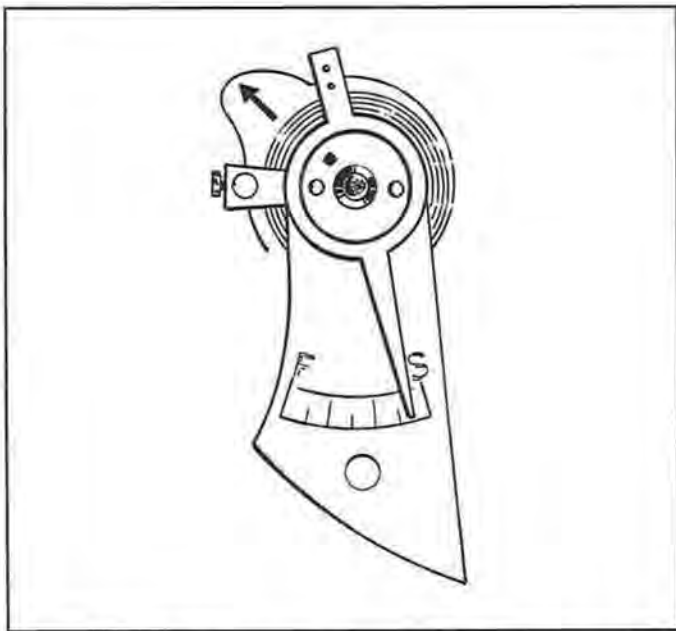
Too little space between the pin and regulator key will bend the hairspring when the regulator is moved.
